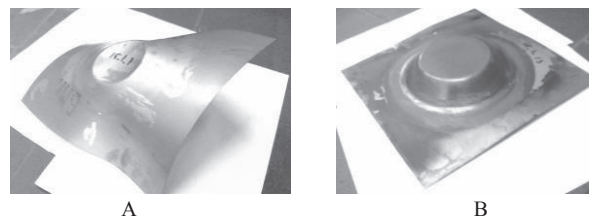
Obtained workpiece geometry for non-heated (A) and heated process variants (B) after unclamping.
